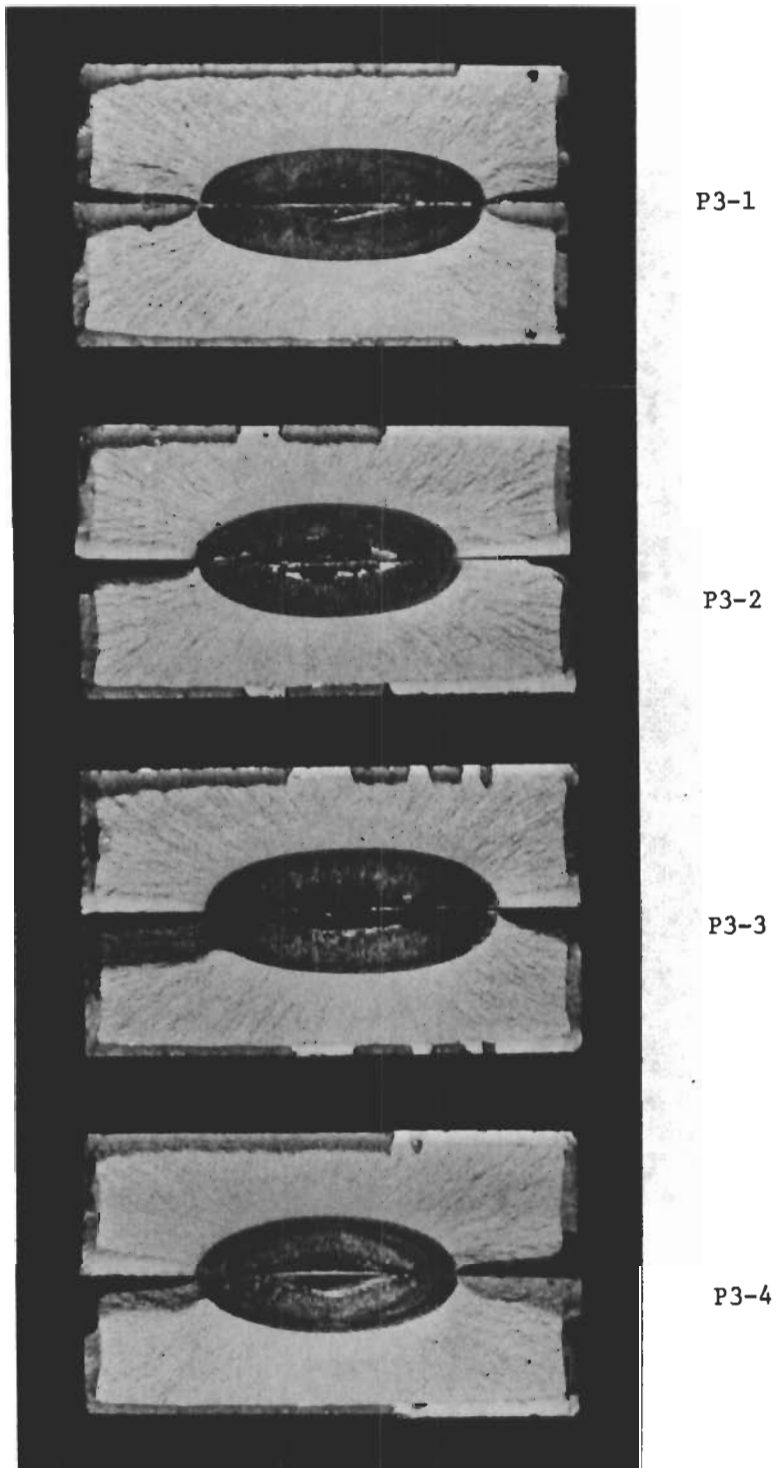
Part-Through-Crack Fracture Surfaces - D6aC 600°F 0.29 in.
